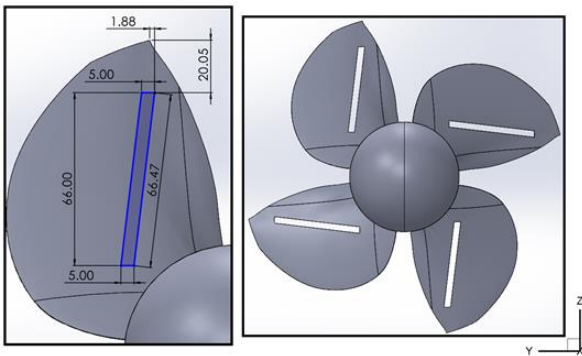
Grooved propeller 841-B and dimensions and size of the groove on the surface of the blade.
